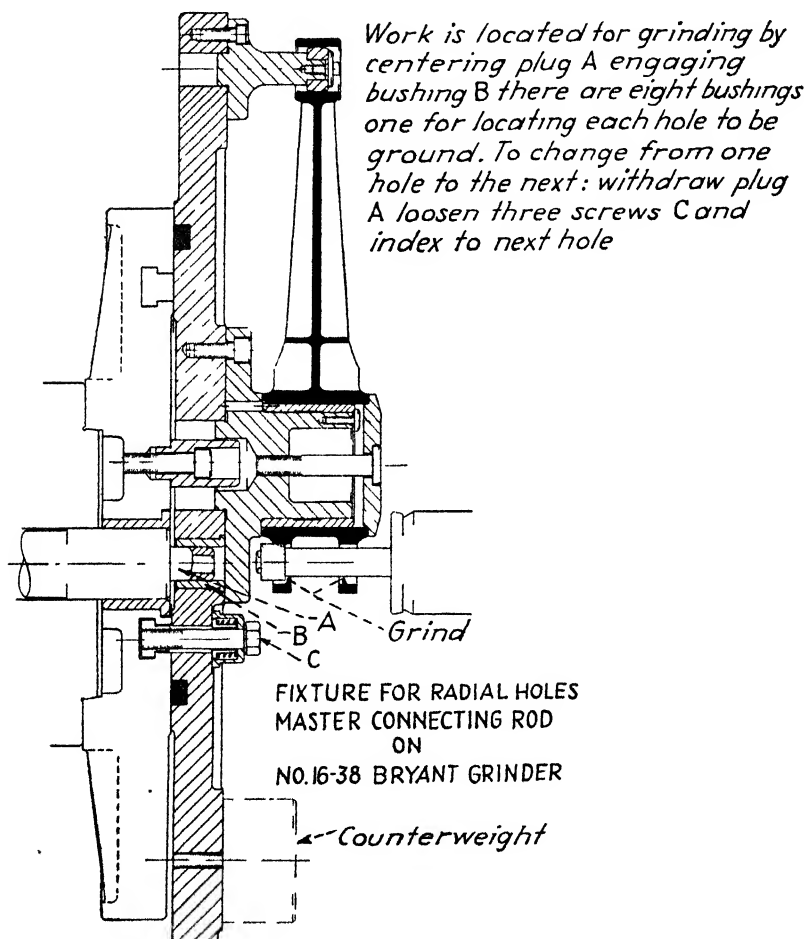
A1.—Section view of fixture for knuckle-pin holes.
